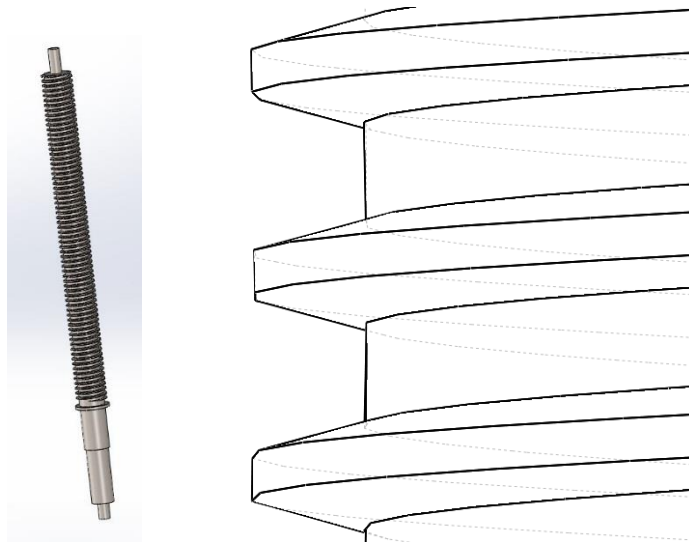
worm drive thread and details of trapezoidal thread profile
